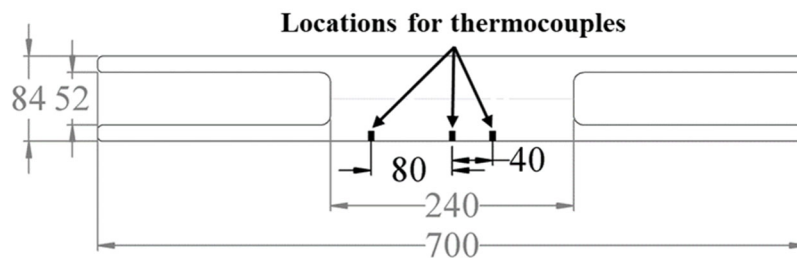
Design of U-Shaped forming test specimen (dimension in mm) with thermocouple locations.
